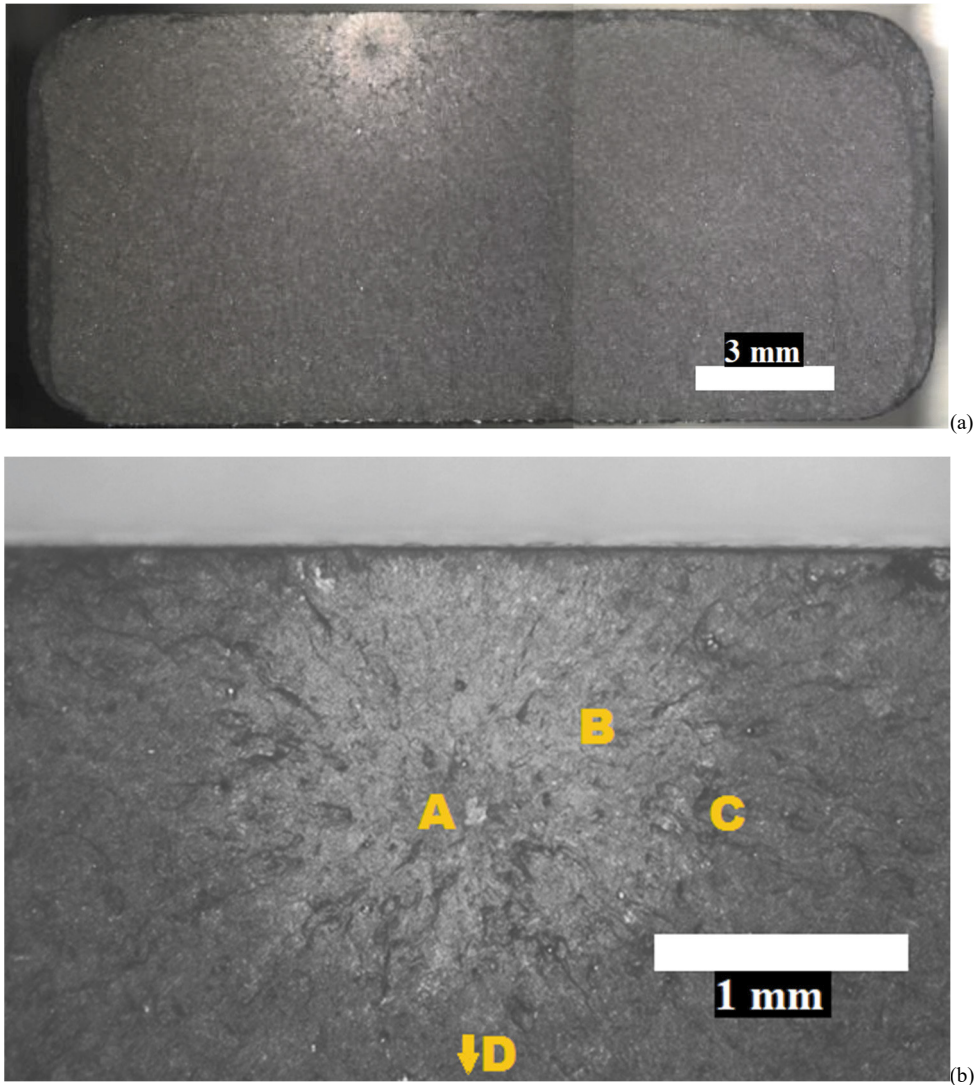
(a) Fracture surface photograph in the cross section (22 x 10 mm) of a laser peened specimen, (b) detail of defect area [7].
